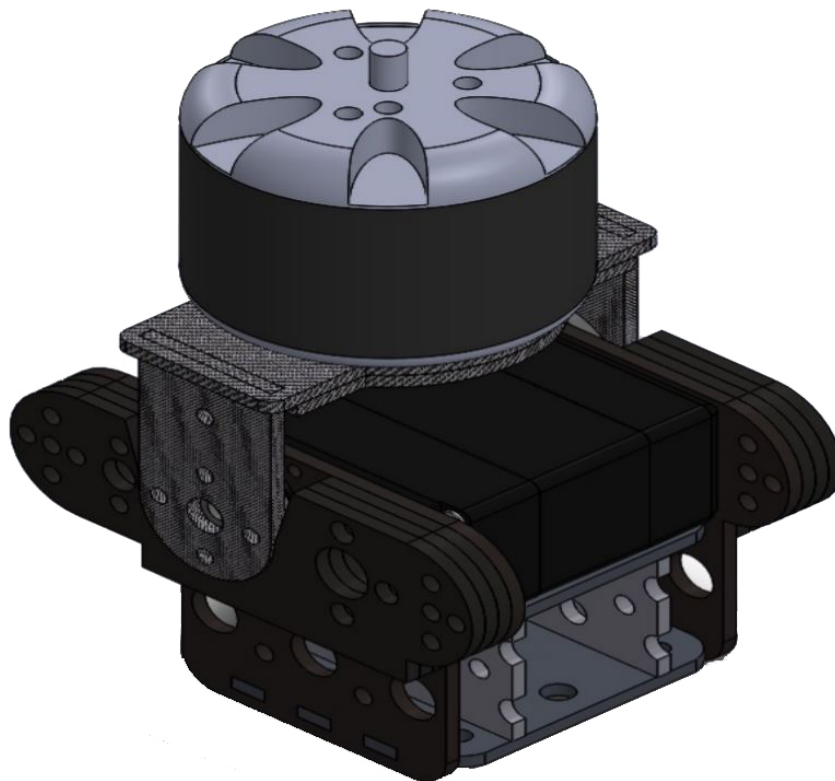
Tilting mechanism with servo motor and brushless DC motor
